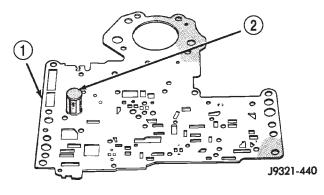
Separator Plate Filter Screen Installation 1 – UPPER HOUSING SEPARATOR PLATE 2 – FILTER SCREEN
